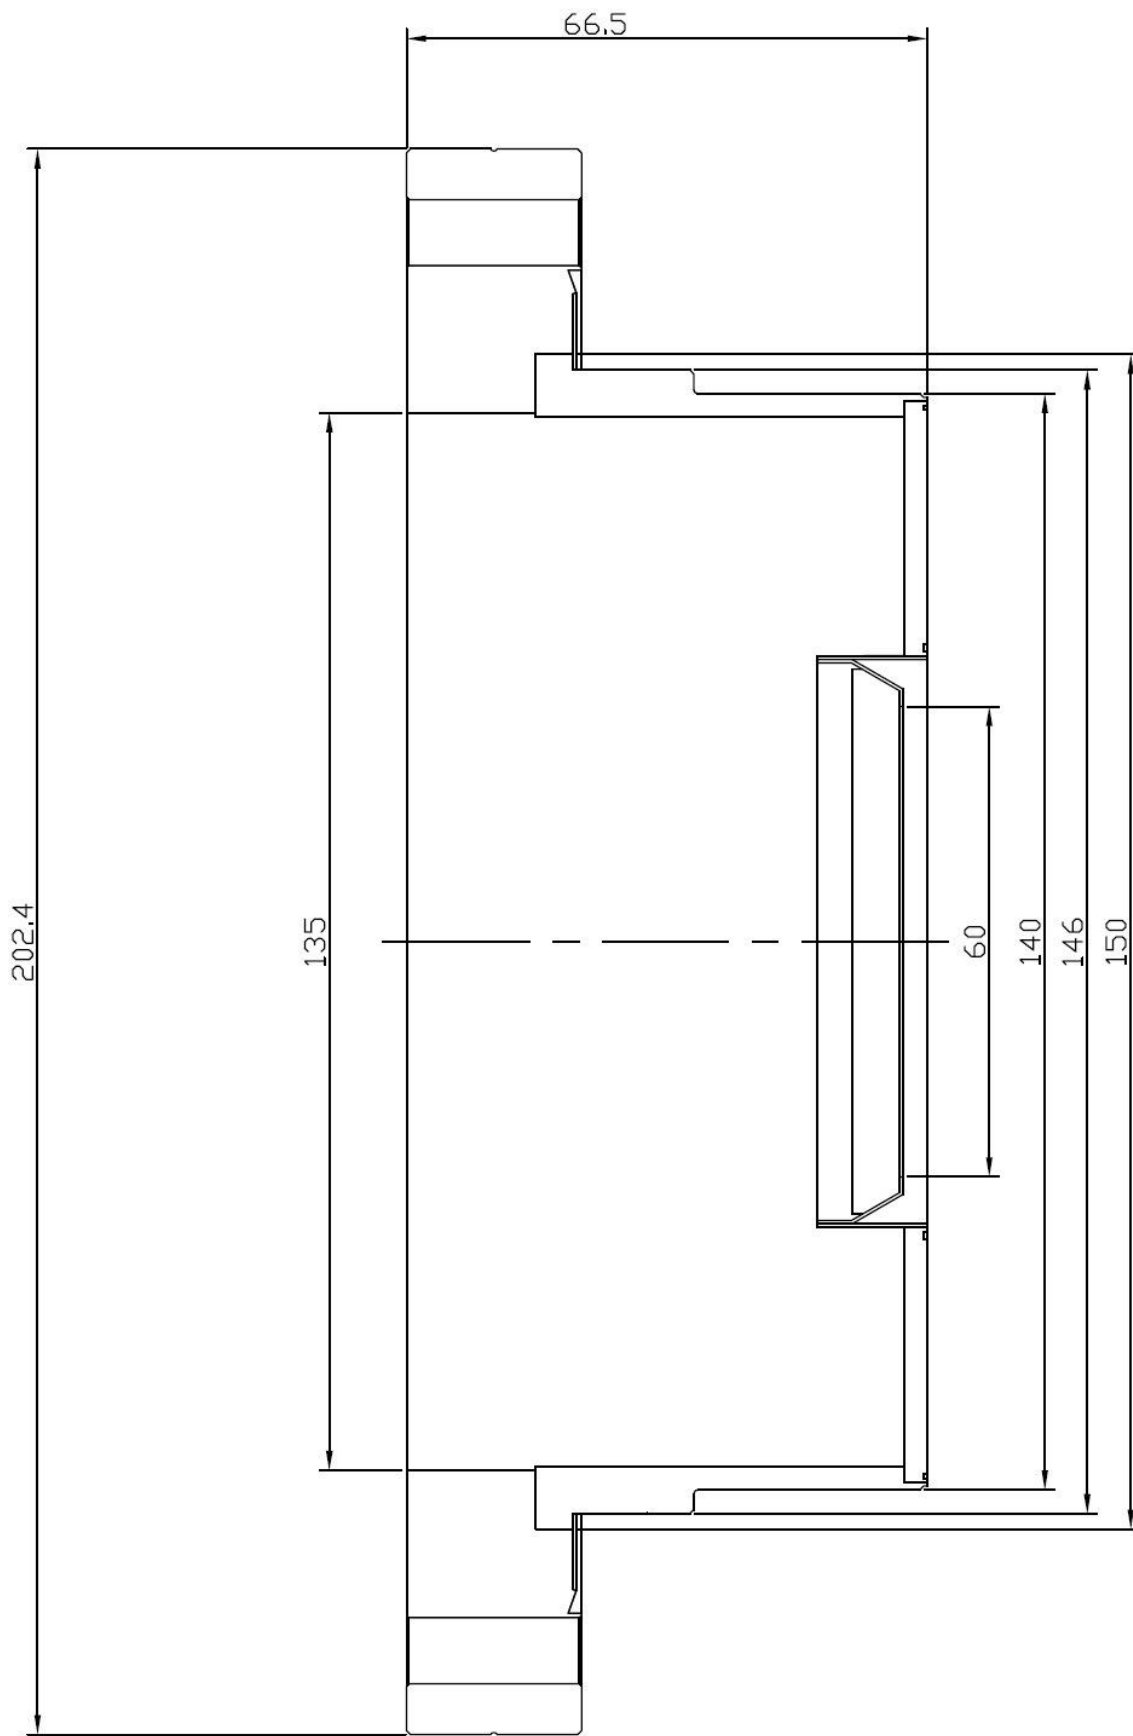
The engineering drawing supplied by the UKAEA who made the viewports.
